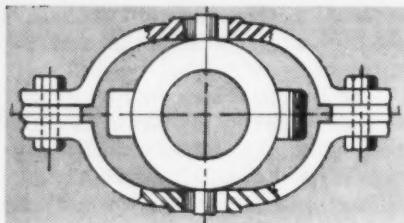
This sketch shows an arrangement designed for moving the shifting collar, in which two pieces of forged steel are utilized.
